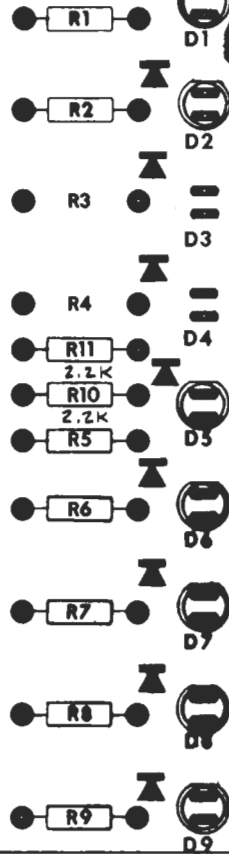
Regulator PCB Assembly, Model 2 (C/D)
